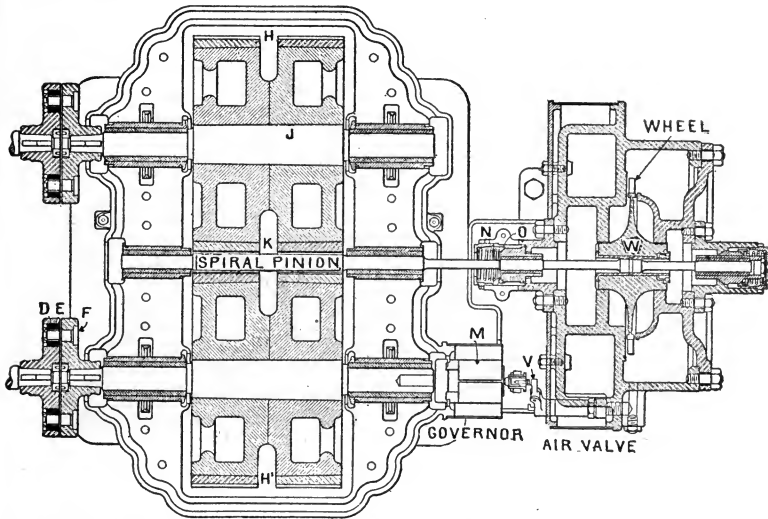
,503.—De Laval simple impulse turbine, consisting of a single wheel *W*, revolving at from 10,000 to 30,000 R.P.M. according to size, and which is attached to a long slender shaft allowing it to revolve about the center of gravity instead of its geometrical center. A set of spiral gears, *K H H'*, (ratio 10:1) reduces the speed and transmits power to two shafts, *J J'*, each being directly connected to a generator. The turbine bearings are held in place by springs *N*, which press against a collar *O*, formed like a socket, thus allowing flexure of the shaft. The couplings have pins *F*, driven into the holes, the opposite flanges being fitted with rubber bushings *E*, having internal steel bushings *D*, which slip over the end of pin *F*, to protect the rubber; this brings wear on the outside. The governor *M*, controls a throttle valve and in case of extreme speed opens a valve admitting air to the wheel compartment by lever *V*, the air friction checking the speed.
